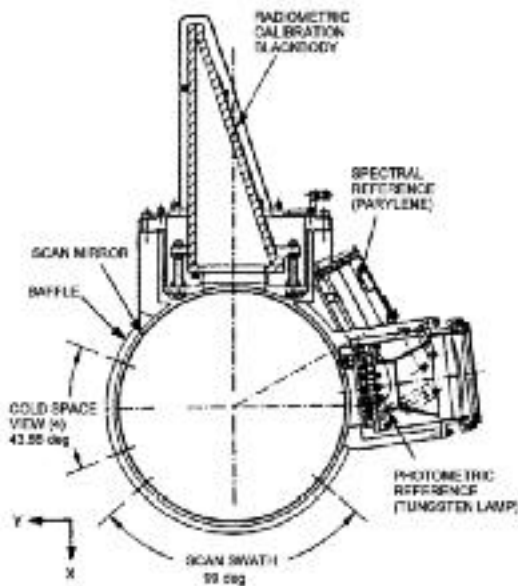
Cross-section of the scan head assembly shows key calibration elements.
